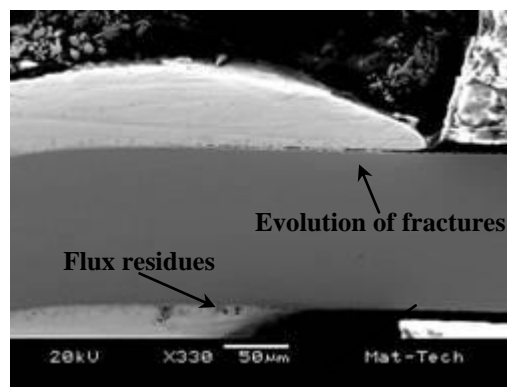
Cross section of an LF-component soldered using LF-paste after accelerated thermal aging: fracture generated (optical microscope image).
